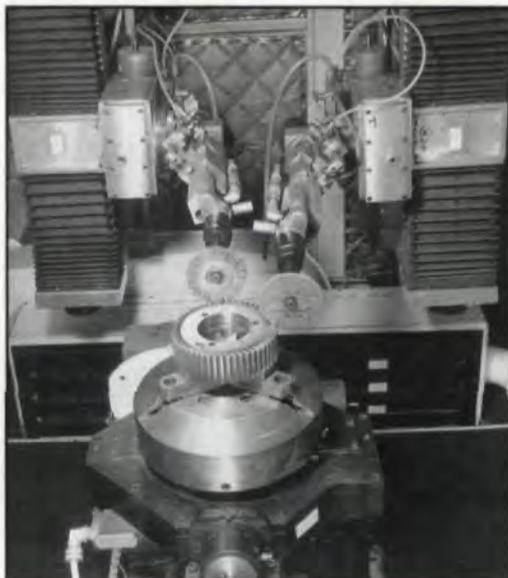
Deburring a spur gear with a brush followed by a grinding wheel.
